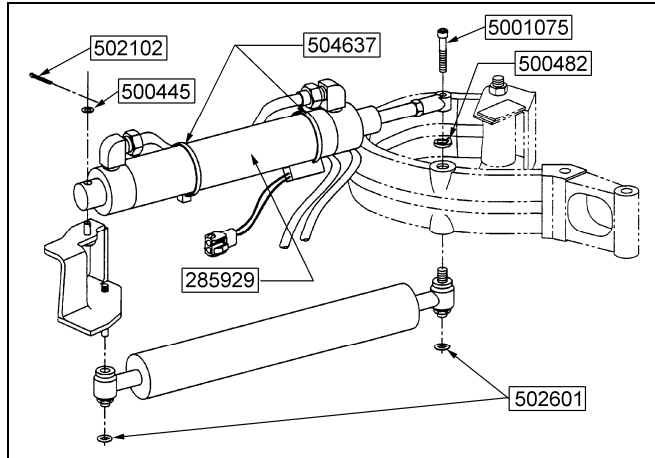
2-INCH AIR CYLINDER ASSEMBLY INSTALLATION
